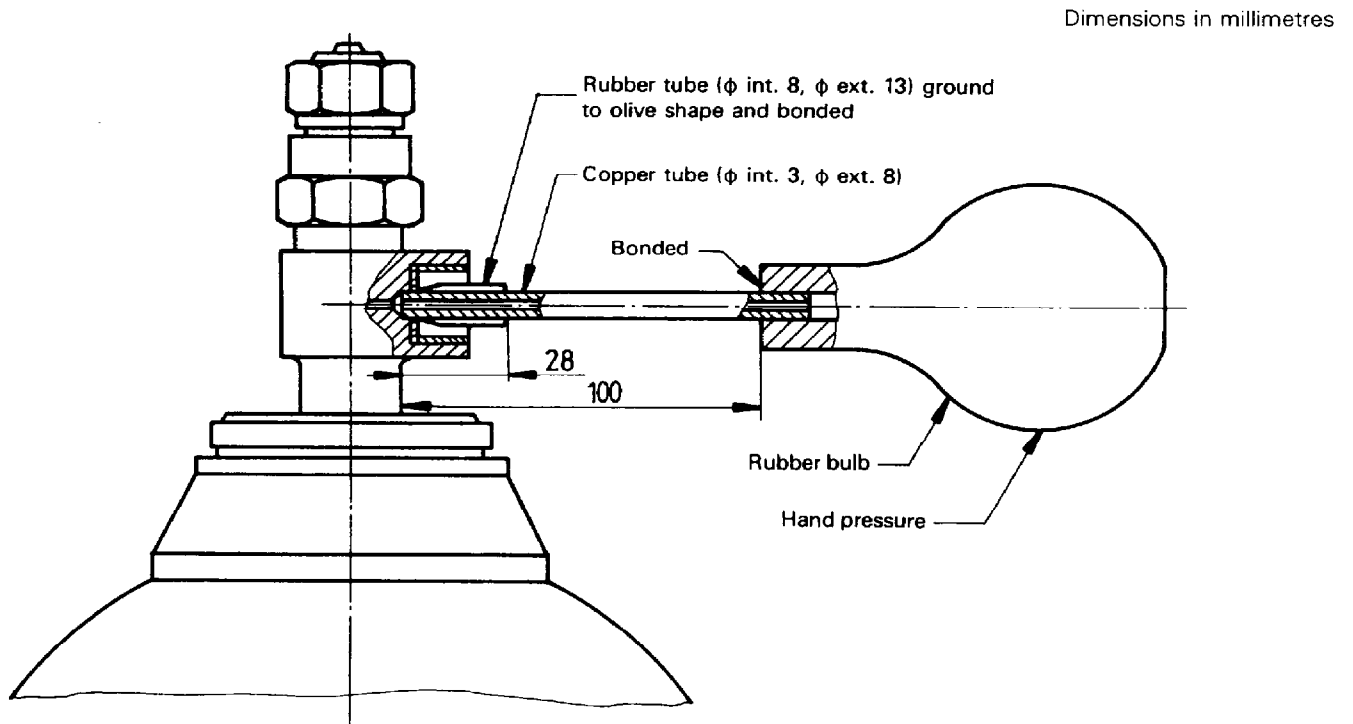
Device used to hand-pump inert gas into a cylinder
